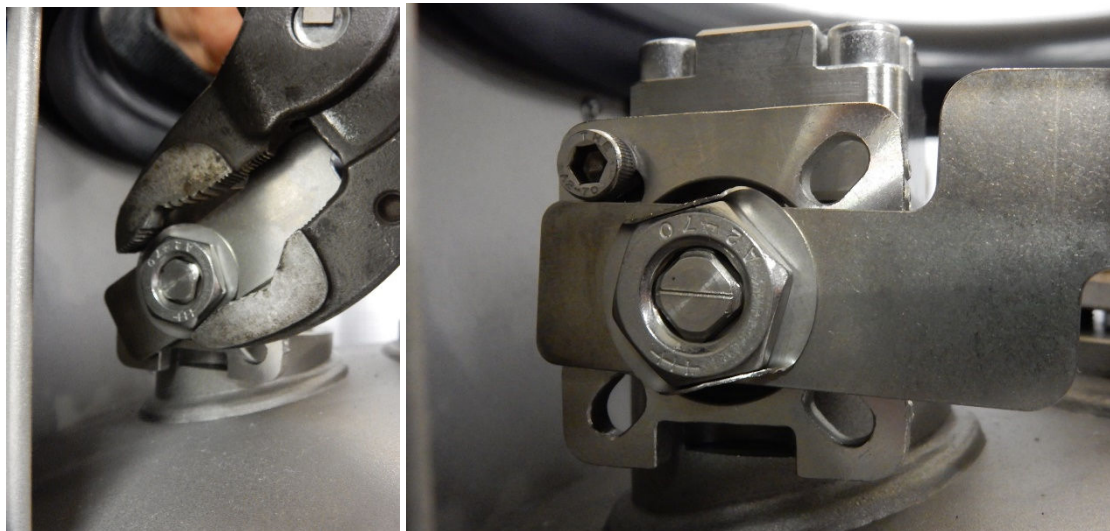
Ball Valve Lever Securing Washer, 0.3mm free edge bending
